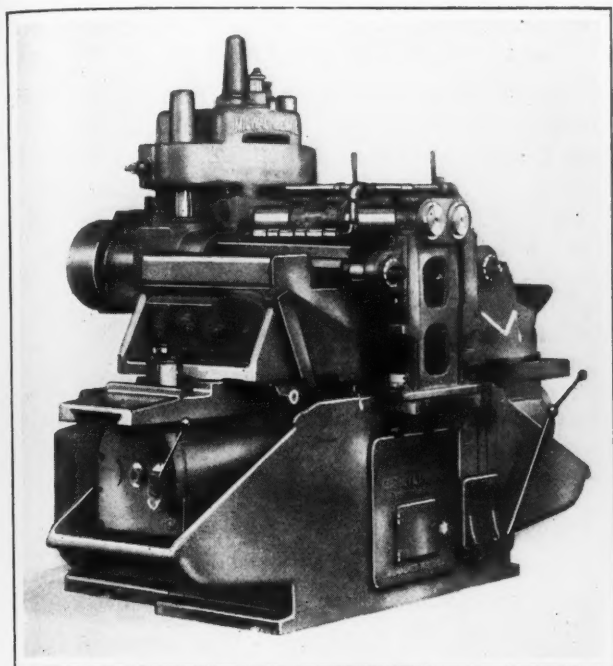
Kearney & Trecker Milling Machine for Roughing the Teeth of Differential Gears
